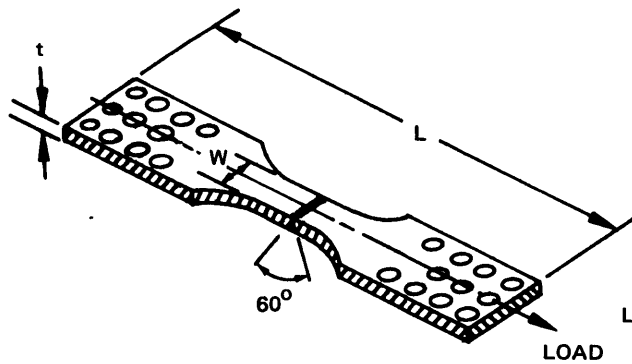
Transverse Butt-Welded Specimen (Radziminski et al., 1970)
